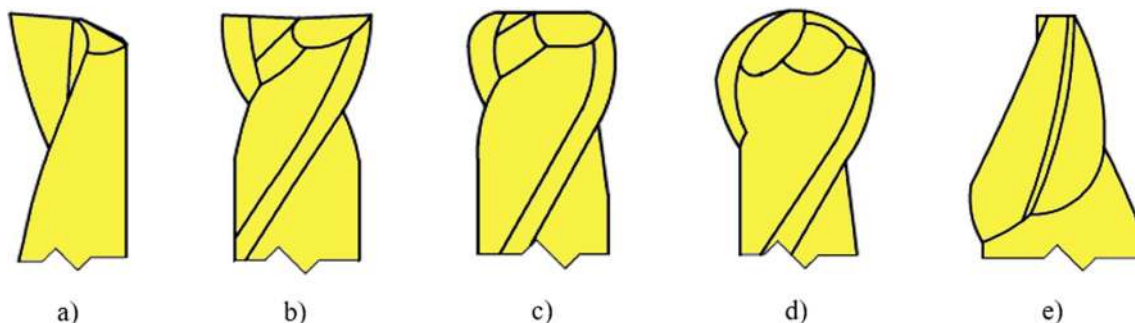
Schematic geometries of micro-milling cutting tools: (a) single-fluted flat end mill, (b) two-fluted flat end mill (c) end mill with corner radius, (d) ball-end mill, (e) tapered micro mill
